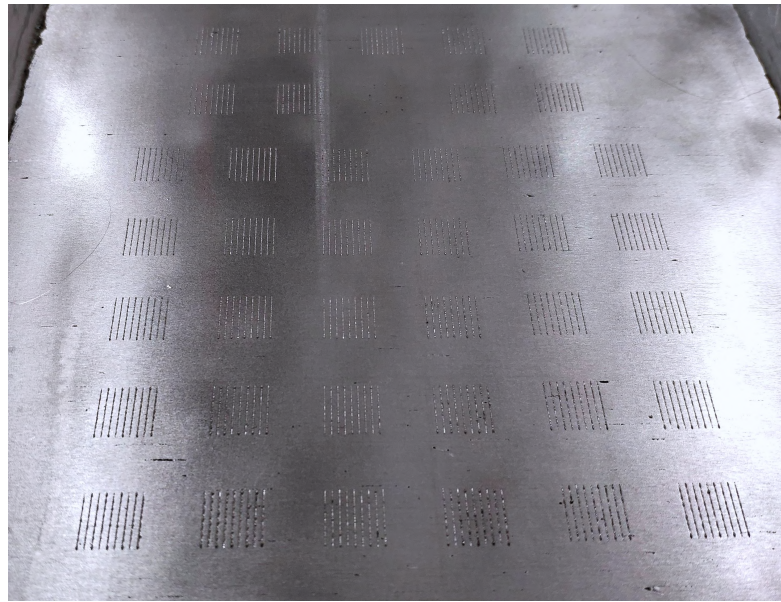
Single tracks of IN625 printed by L-PBF.
